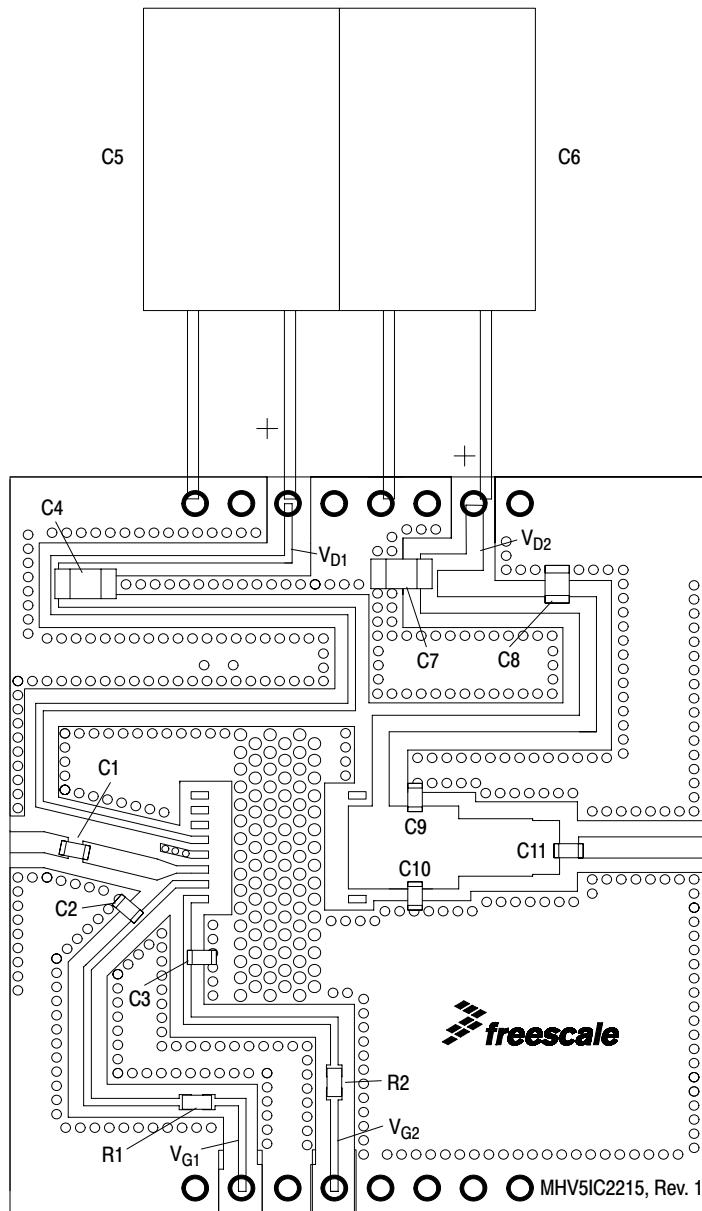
MHV5IC2215NR2 Test Circuit Component Layout
